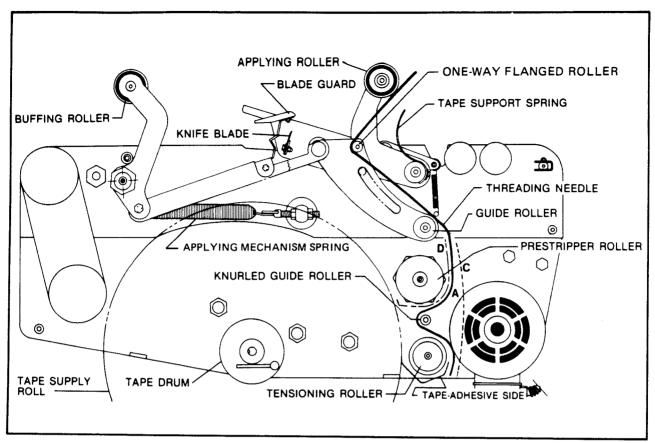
A TAPE THREADING DIAGRAM - BOTTOM TAPING HEAD - LEFT SIDE VIEW
